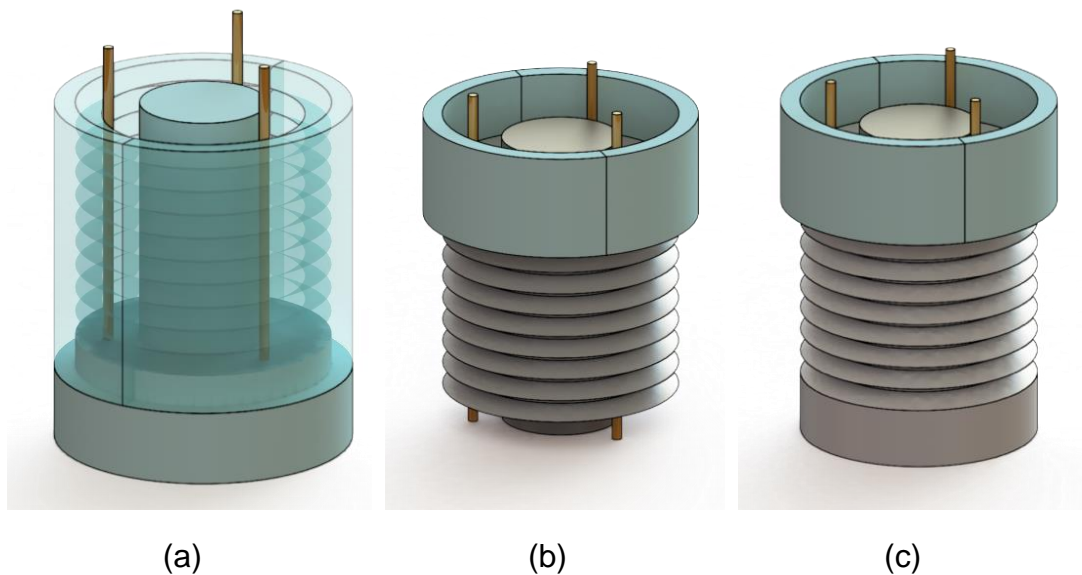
Fabrication of the complete module. (a) Pouring the Ecoflex 0030 into a fully assembled mould. (b) Placing the controllable stiffness element into the bellows-like structure and pouring the Dragon Skin 30 to create top cap. (c) Pouring the Dragon Skin 30 to create bottom cap.
